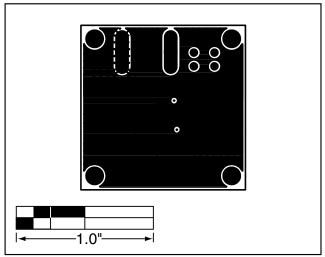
MAX2645 EV Kit PC Board Layout—Ground Plane
